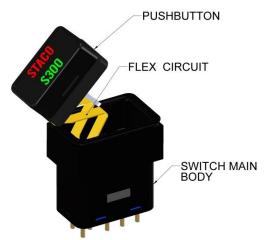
Pushbutton switch – exploded view (Drip-proof and PC termination version shown)
